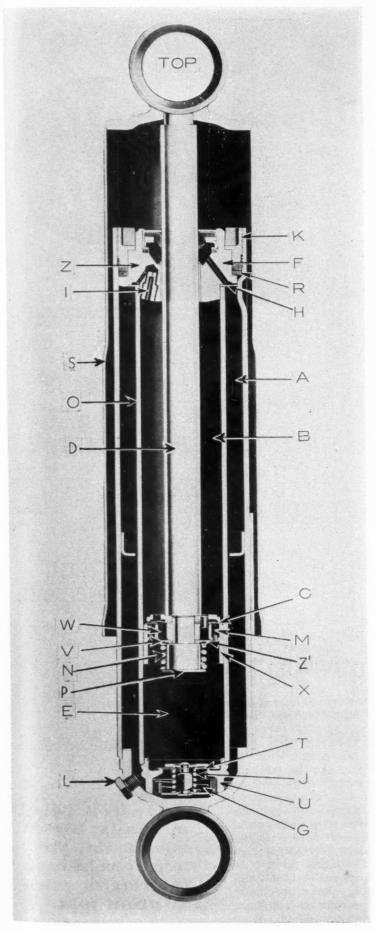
Sectional view of the new Delco direct double-acting shock absorber used on the rear suspension of the 1938 Buick.
